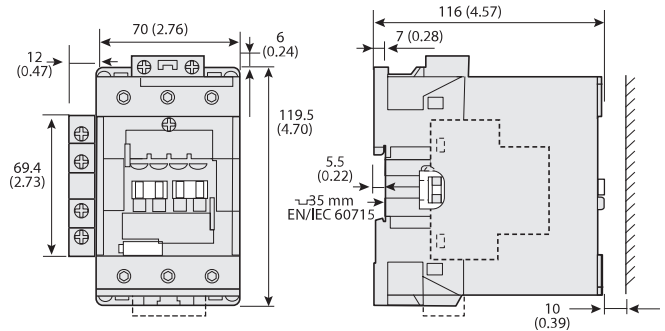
100-E80...100-E96 3-Pole Contactors with Front-mounted Auxiliary Contact
